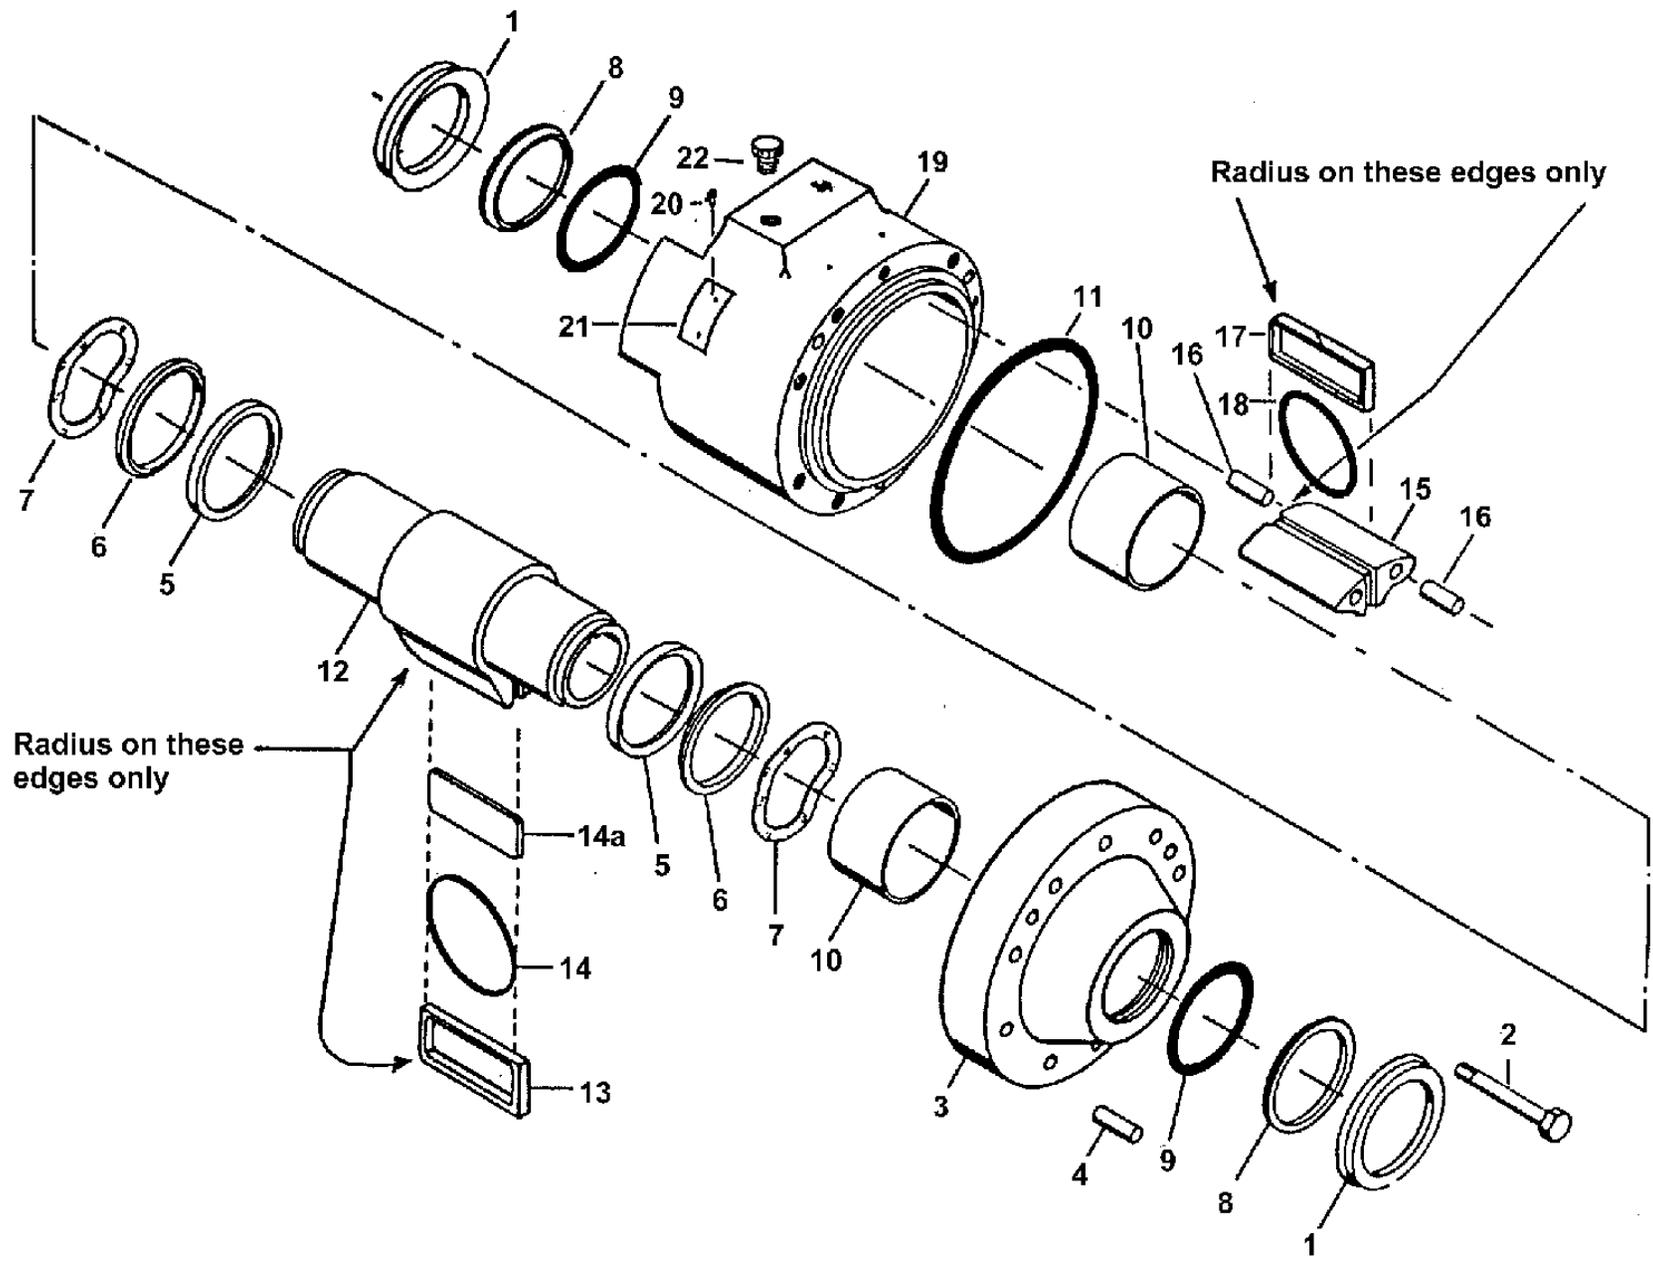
Old Style HS Series Rotary Actuator Assembly exploded view. See page 8 for reference
